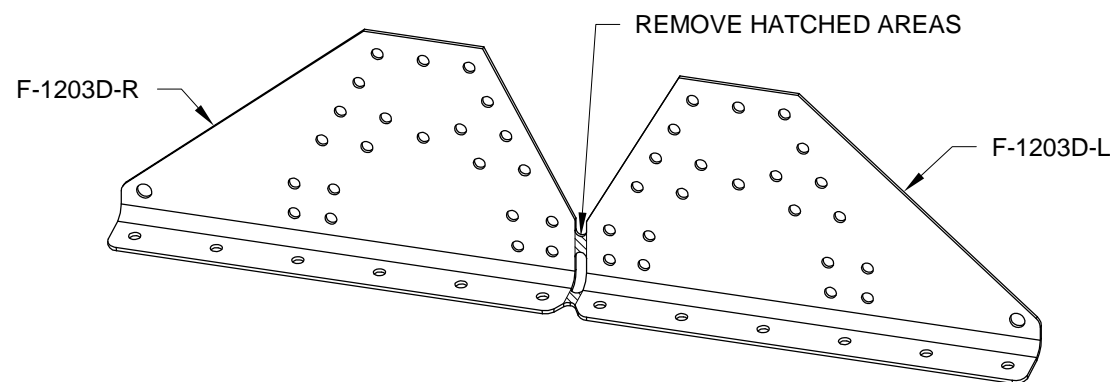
F-1203D STUB SPAR RECEPTACLE SUPPORT
